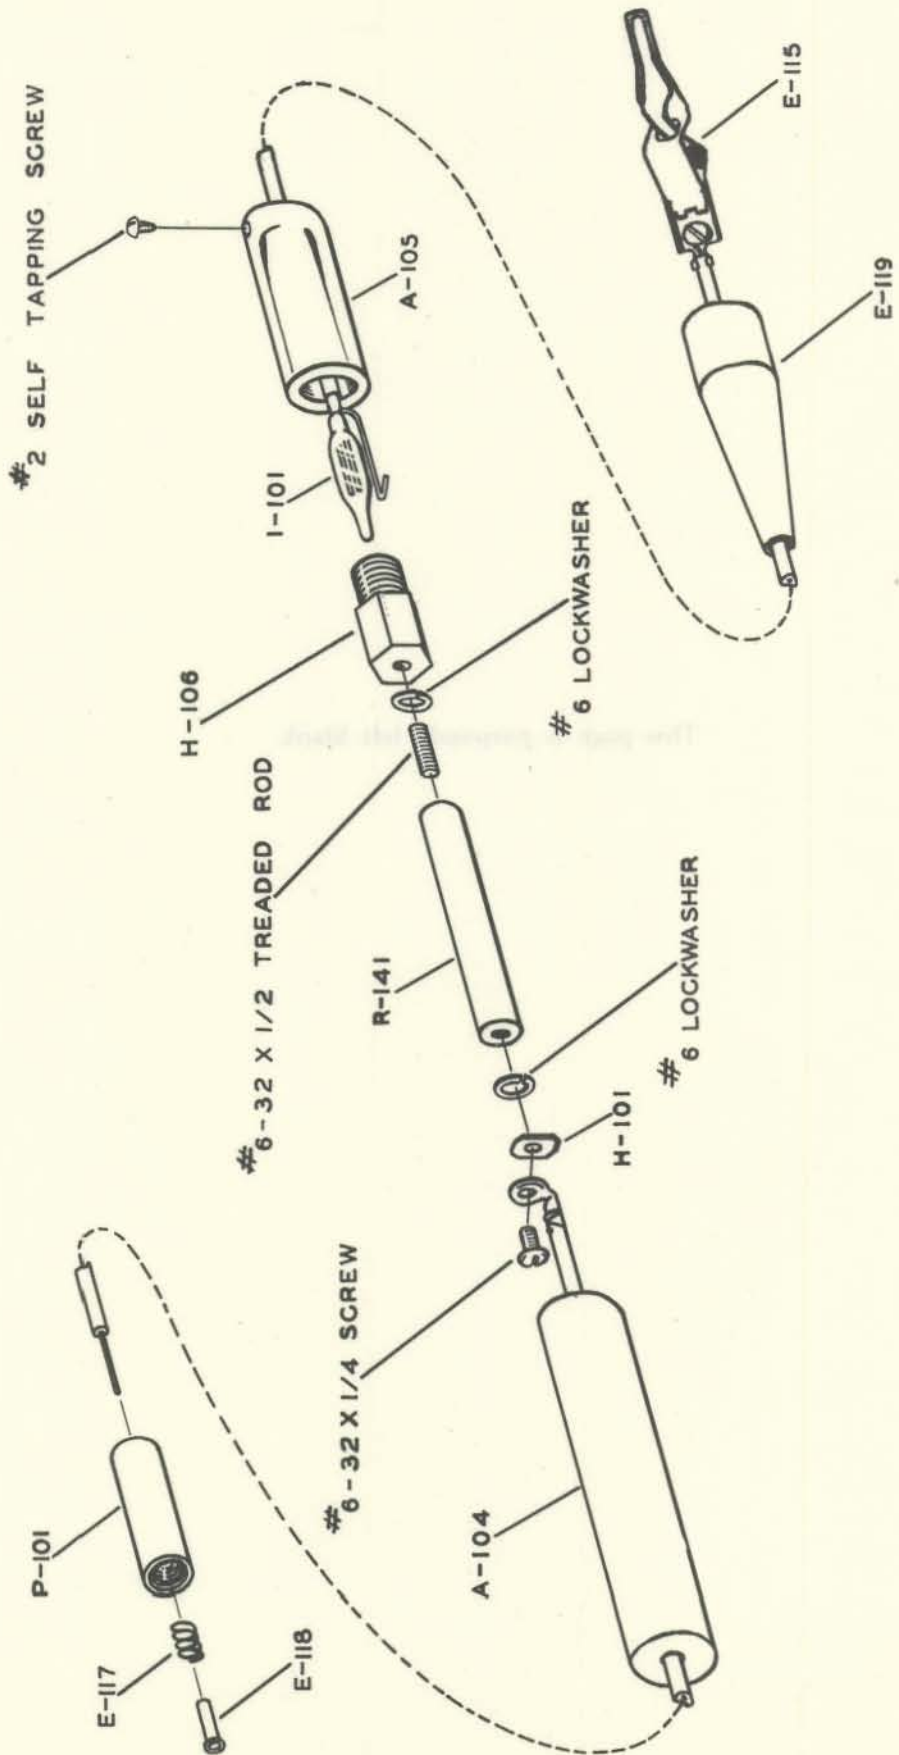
Exploded View of High Voltage Multiplier Housing.
